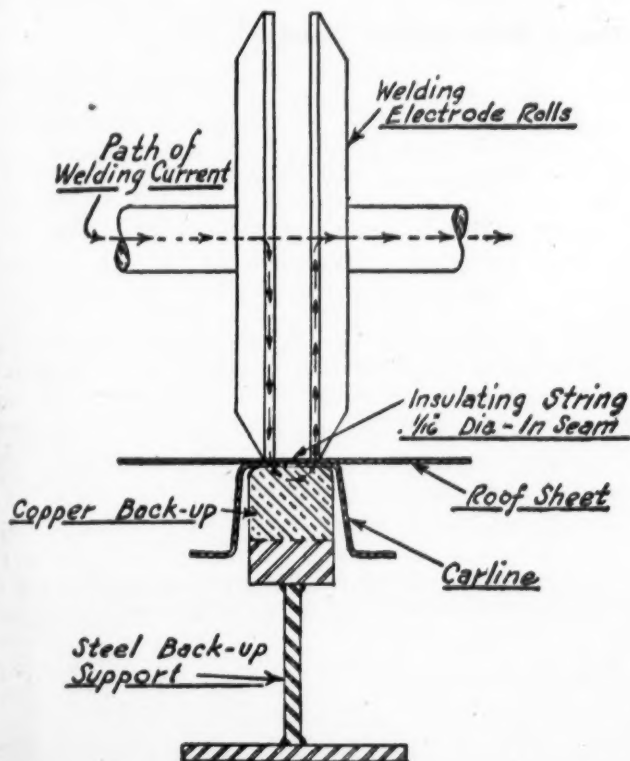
Path of welding current through the electrode rolls, roof sheet, carline and copper back-up bar
